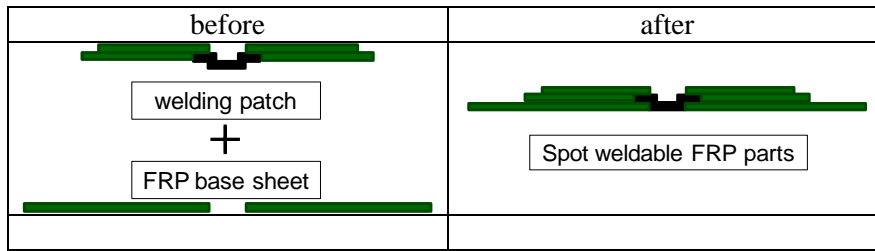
Welding patch and base sheet before and after thermoforming to spot weldable FRP parts.
